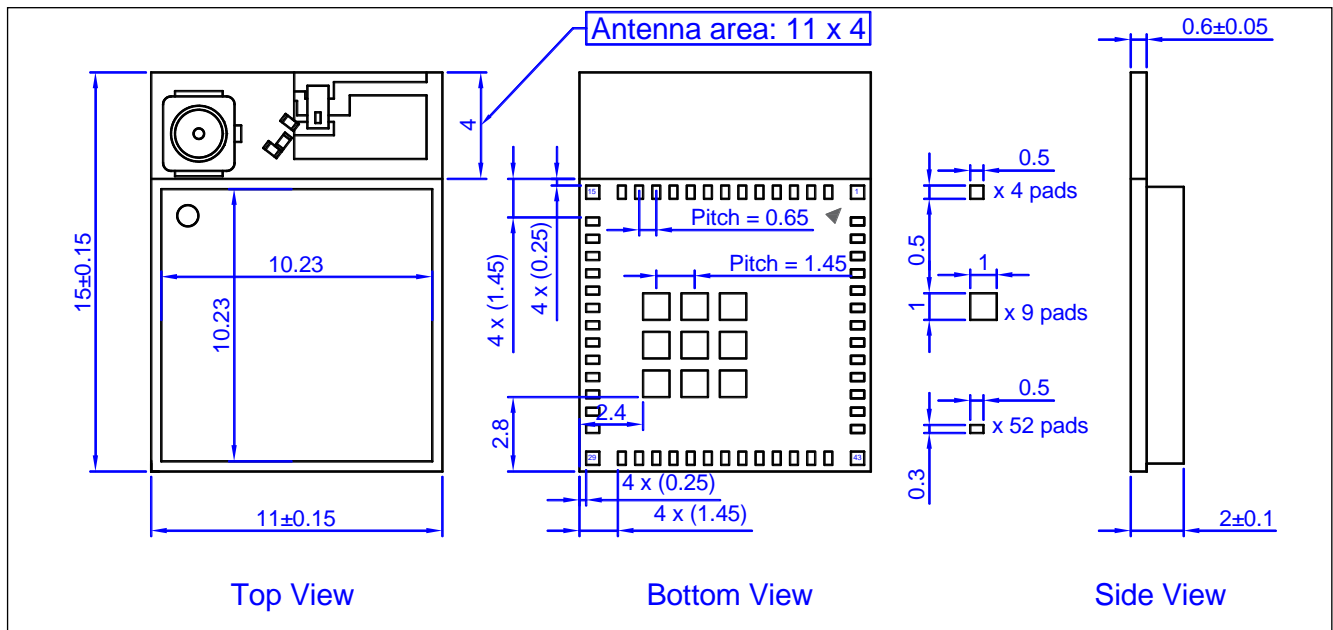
Mechanical Drawing of BDE-BW3300U1 and BDE-BW3300A1
